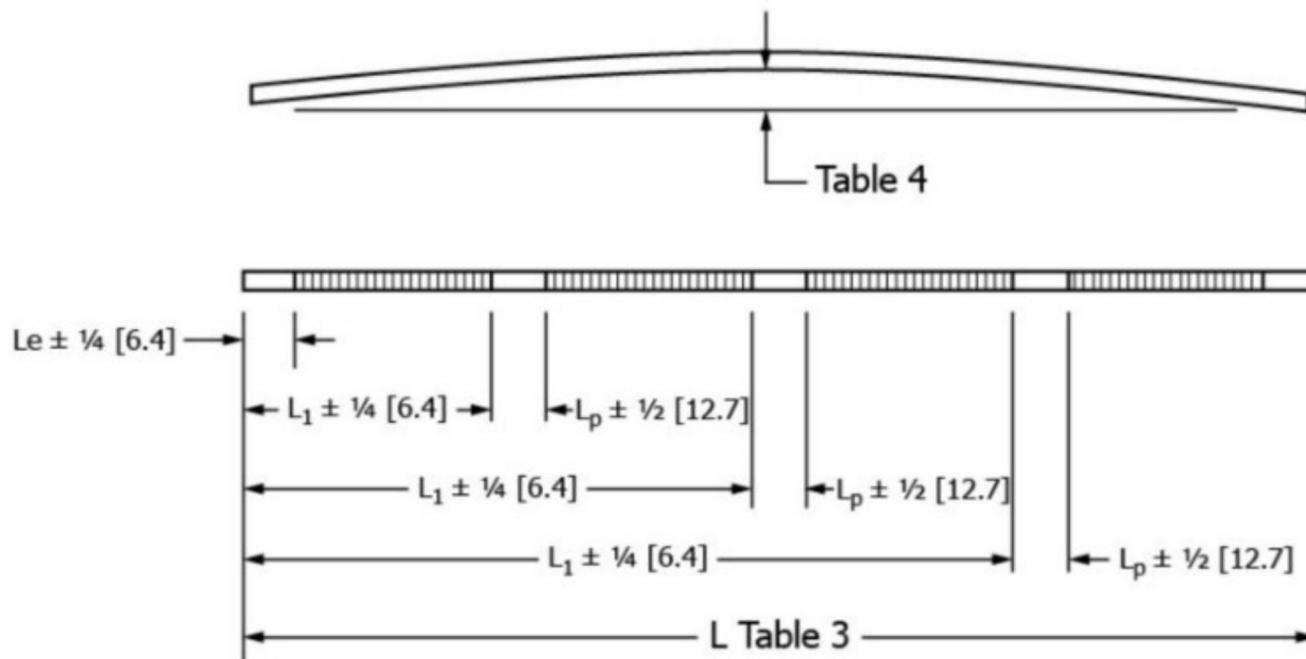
Straight Tube Dimensional Tolerances
